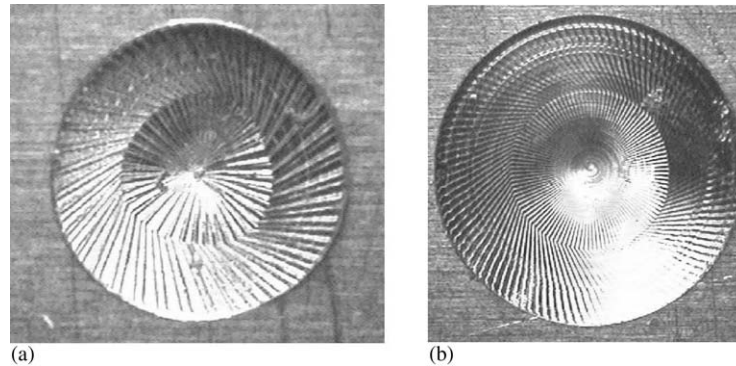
Striations in the bottom of the hole caused by vibration of the drill in aluminum 7050-T7451B: (a) drill 2, 3200 rev/min, feed 0.05 mm/tooth, 2060 Hz bending chatter; (b) drill 5, 4000 rev/min, feed 0.05 mm/tooth, 7570 Hz torsional chatter.
